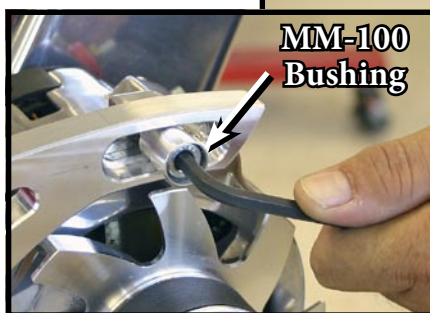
Place the compressor clutch cover (394-A) onto the compressor clutch and align. Thread the three (S520) M6 - 1.0 x 16mm button head bolt through the cover and into the clutch and tighten. Caution - Do not over-tighten! Install (P412) A/C unit. Through the front main bracket install (S551) One M8 x 25 mm SHCS into the compressor lower mounting ear and One (S553) M8 x 35 mm into the upper mounting ear along with One (MM100) bushing, (leave both loose at this time).
